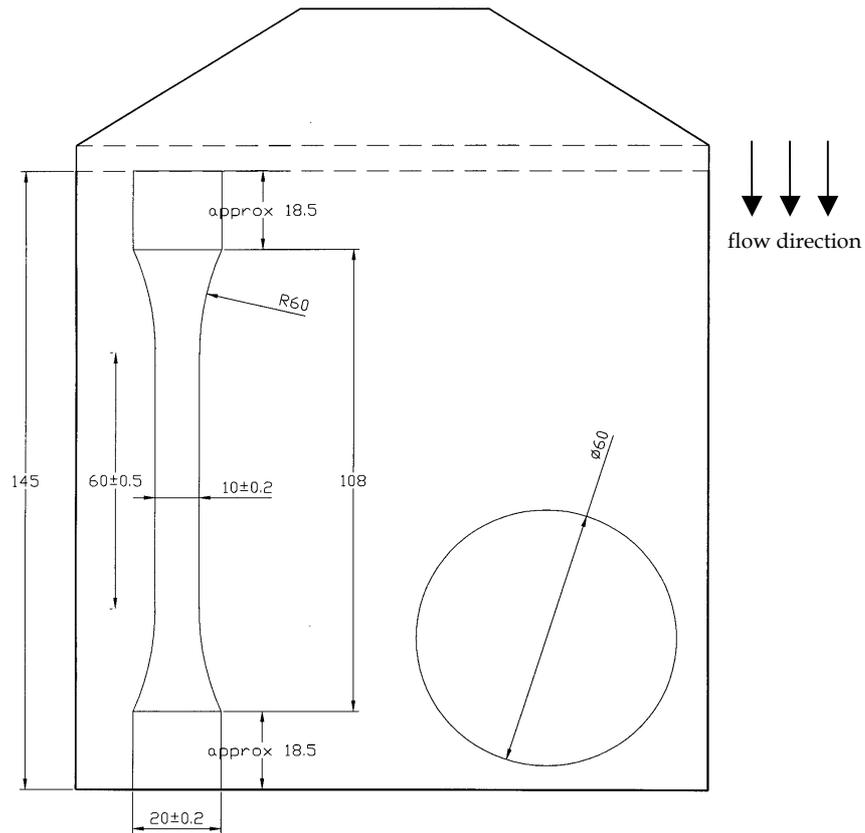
Schematic diagram of the location and orientation of test-pieces machined from each moulded plate (dimensions marked in mm).
